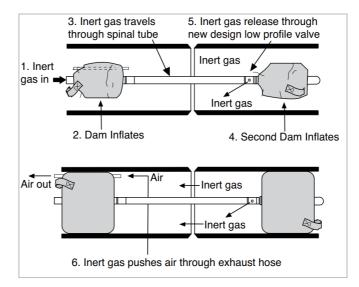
Weld purge plugs – Source: Huntingdon Fusion Techniques – HFT (https://www.lgtechniek.be/fileman/Uploads/Documents/Huntingdon/HFT.pdf)
